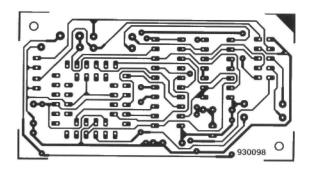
The PCB for the copybit eliminator is small enough to be built into the mother equipment.
